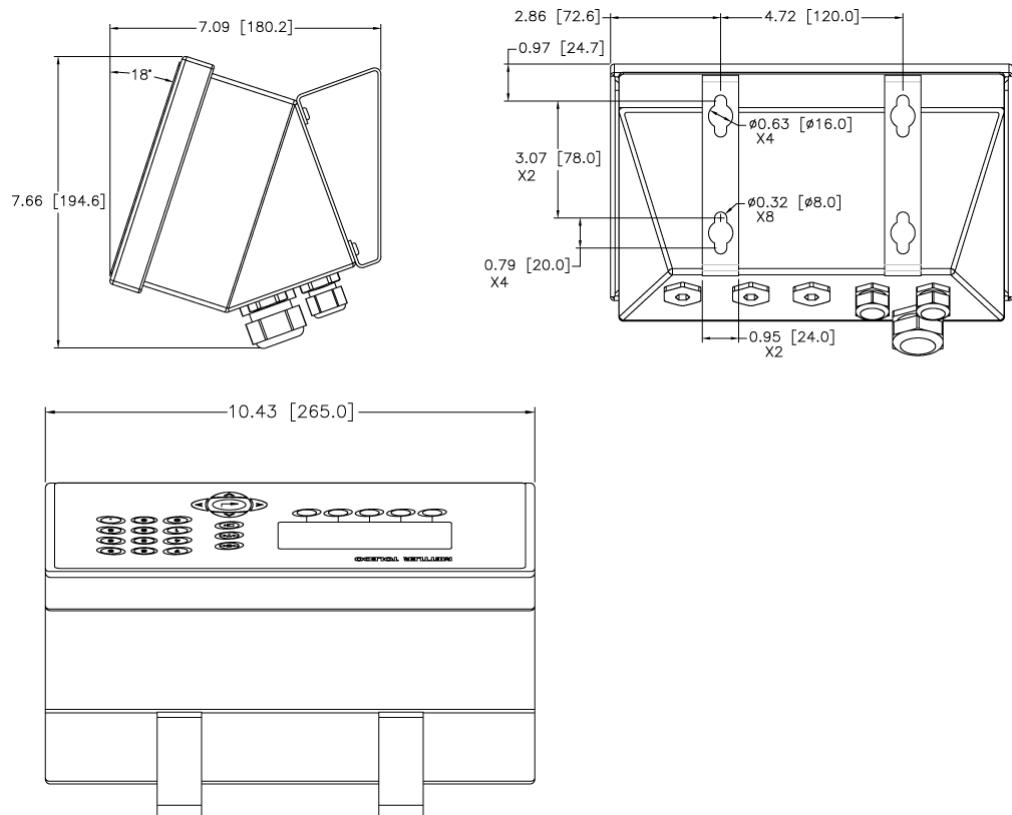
Harsh Environment Enclosure Dimensions with Optional Brackets
